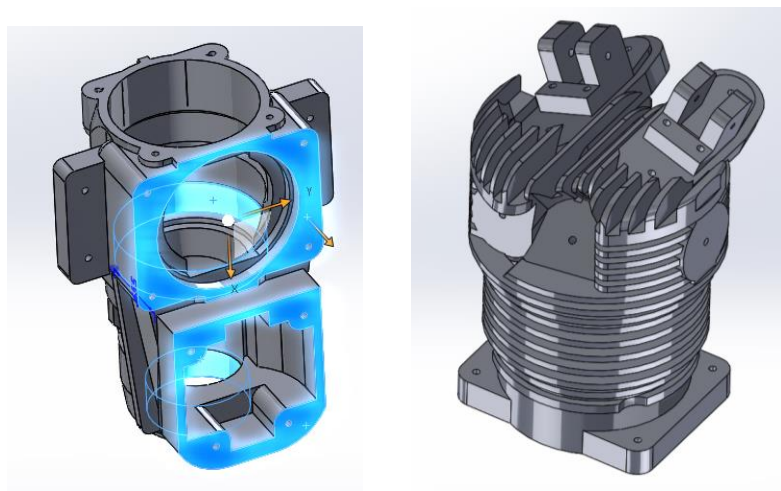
Model preparation for AM, with gasket faces and bearing surfaces highlighted, crankcase (left) cylinder head (left)
